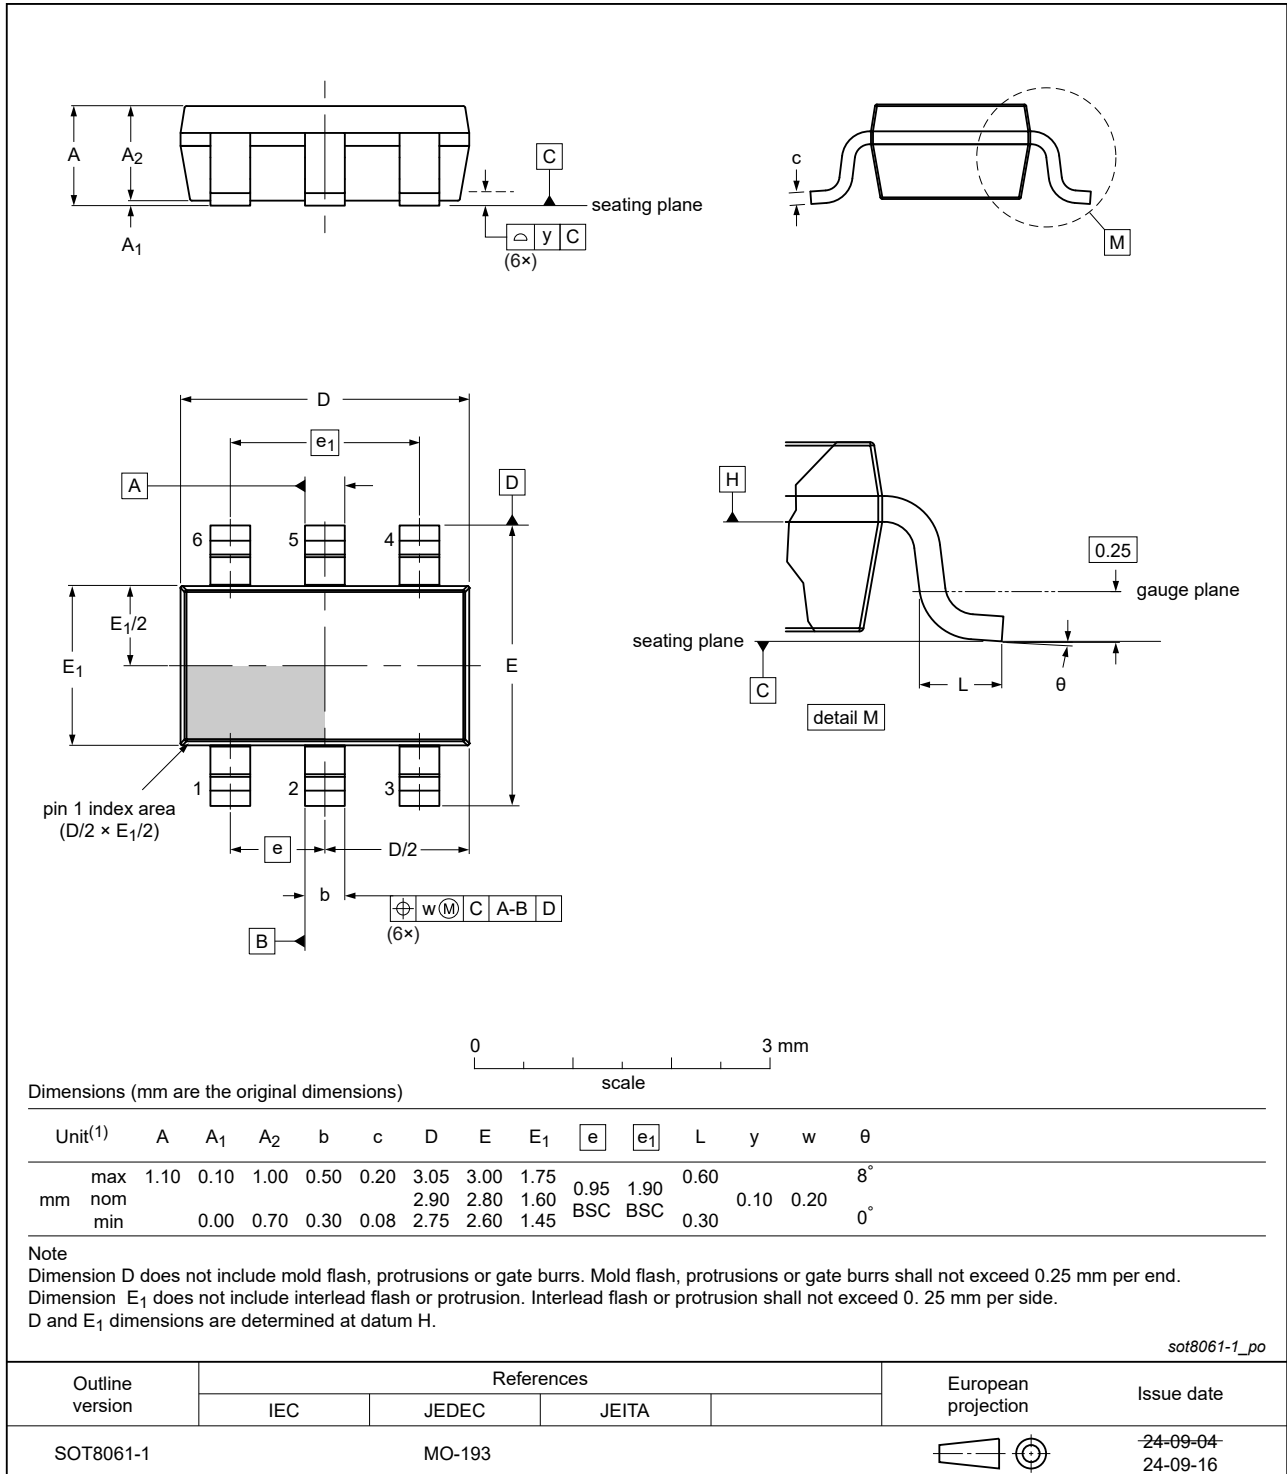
Package outline SOT8061-1 (TSOT23-6)
